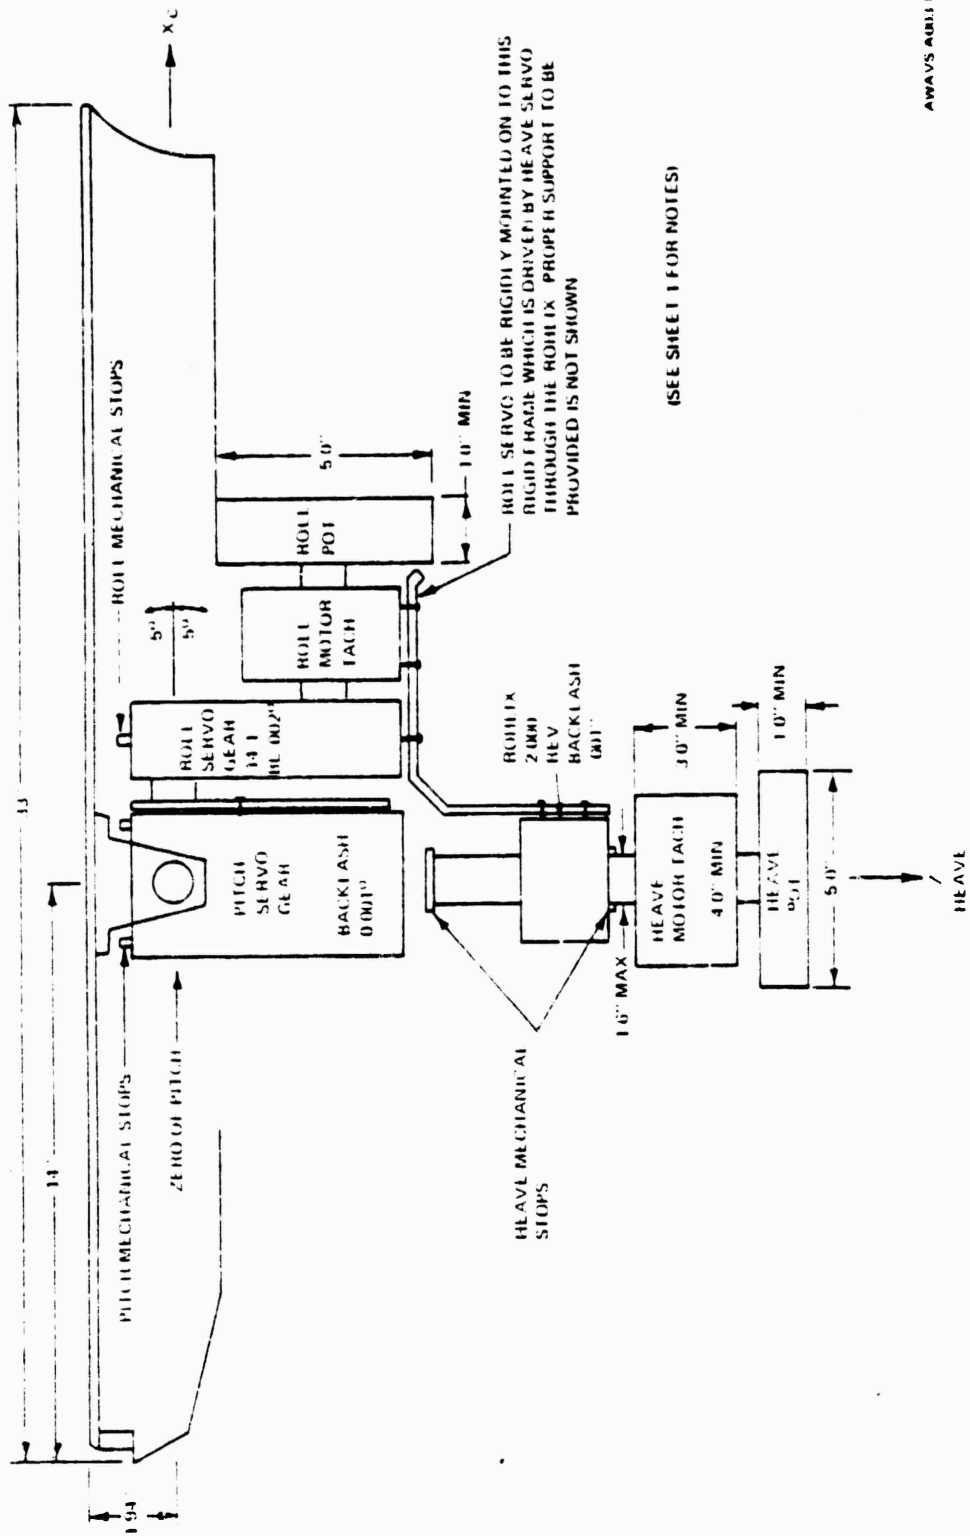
Physical Setup of Carrier Model Servos (Sheet 2 of 3)
